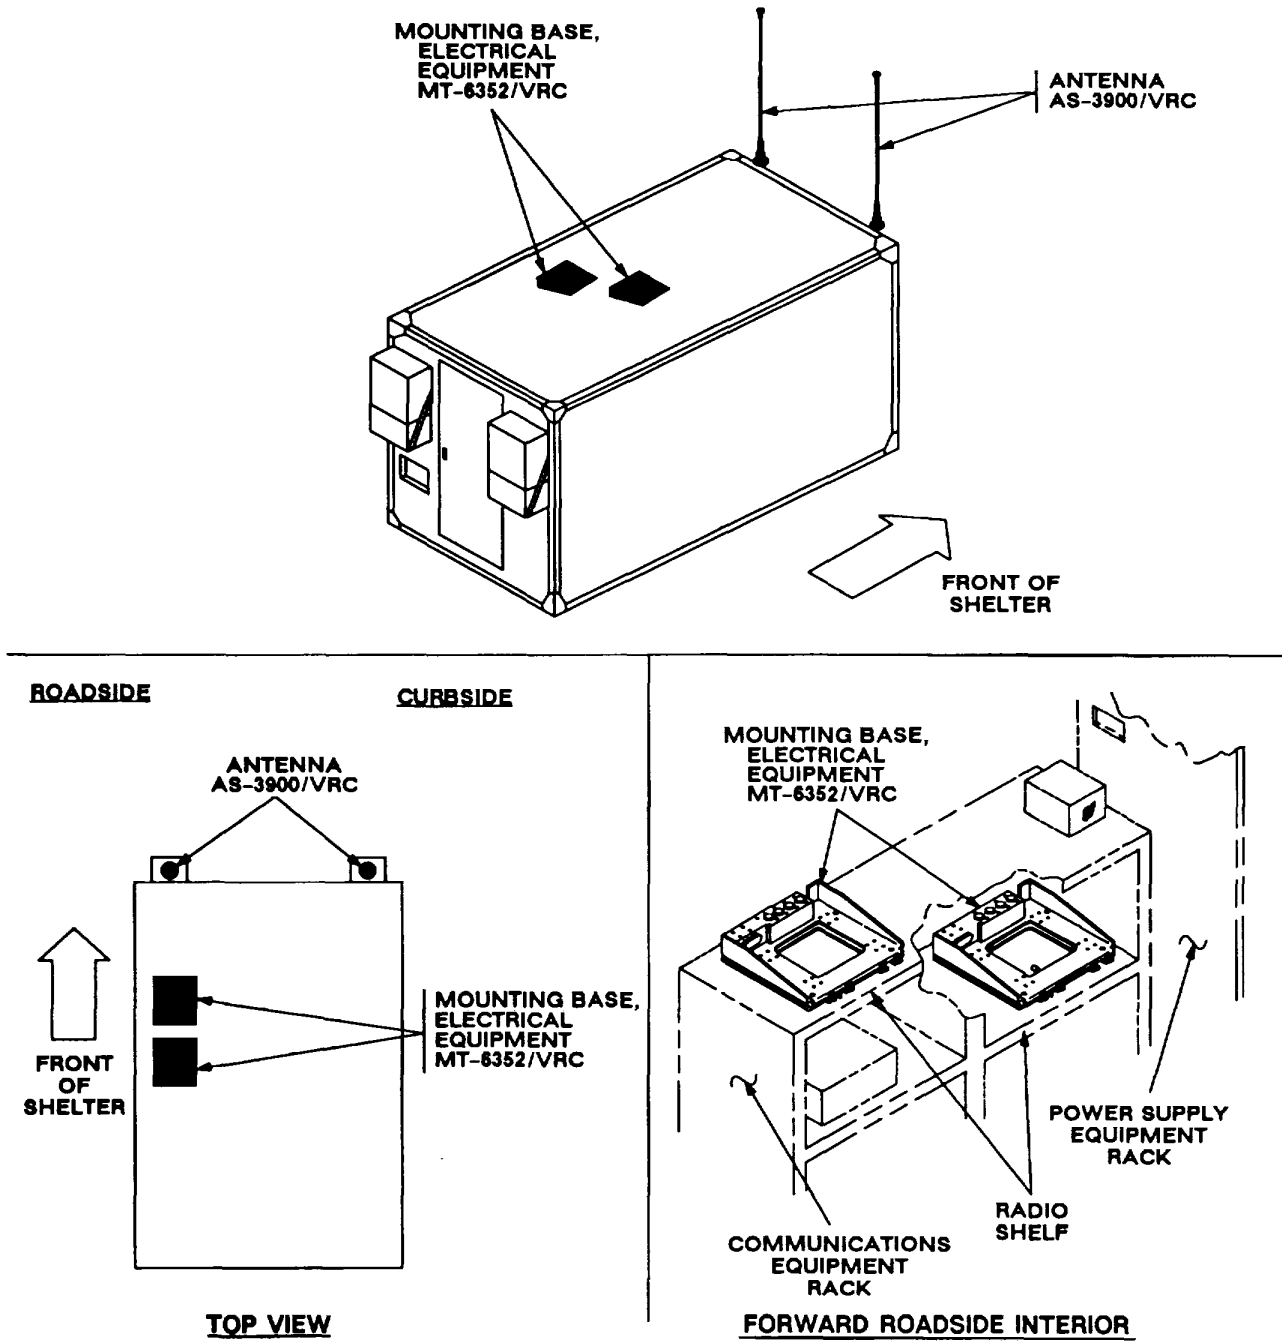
(1). MK and Radio Installation: MK Equipment Locations
